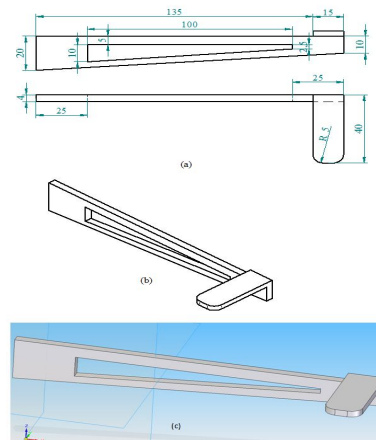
(a) Optimized 2D brake pedal, (b) and (c) Optimized 3D brake pedal CAD model
